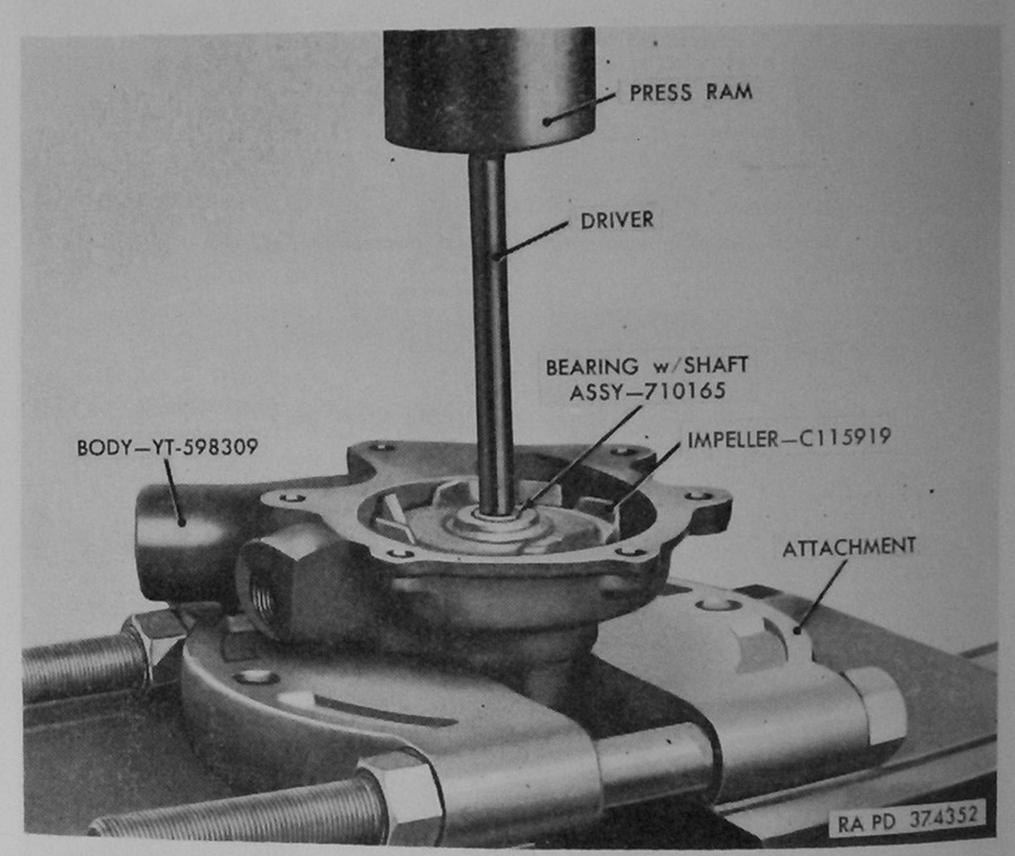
Pressing bearing with shaft assembly from water pump impeller—engine assemblies 7411599 and 8329440.
